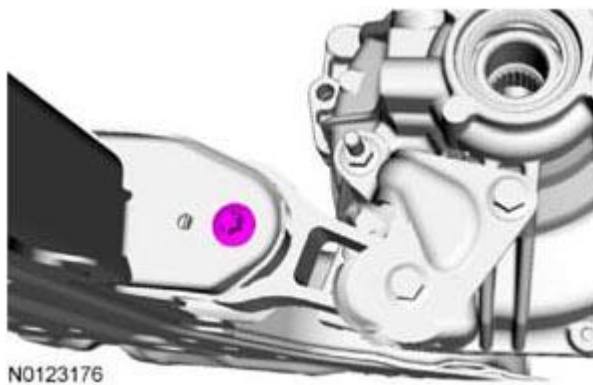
Identifying Transaxle Roll Restrictor Bolt
